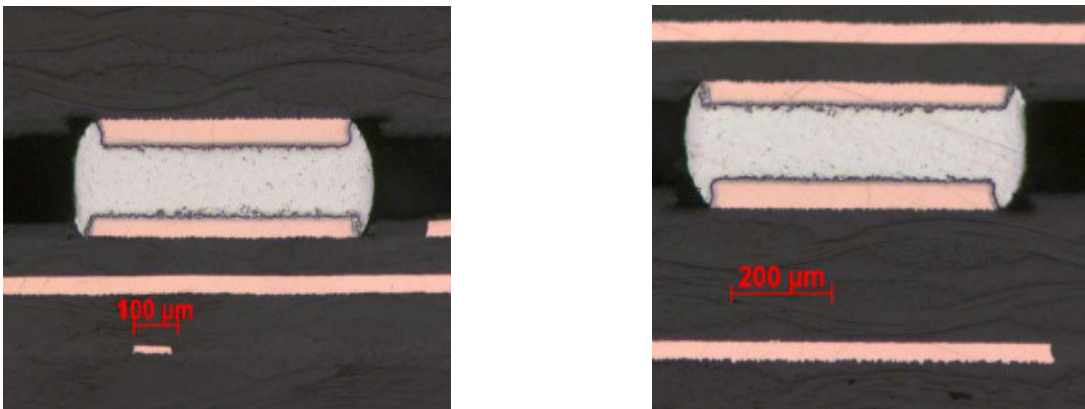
Solder joints between DSC 1.0 module and base board (metallographic microsection analysis)
